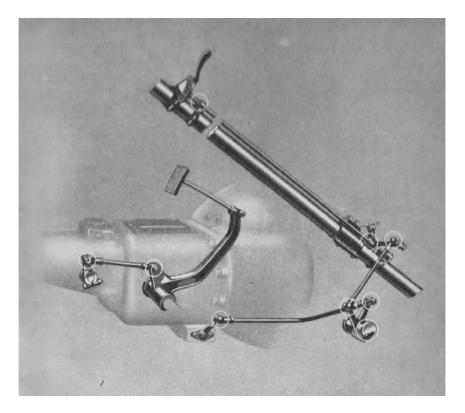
Gearbox Control Rods Lubricate with oil can where indicated by rings
